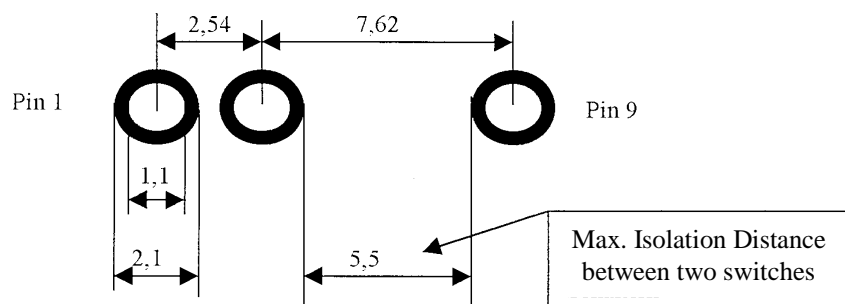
Dimensions in [mm] for solder pads (as a proposal for a design) and solder pad gaps (partial drawing) with maximum distance between two switches
